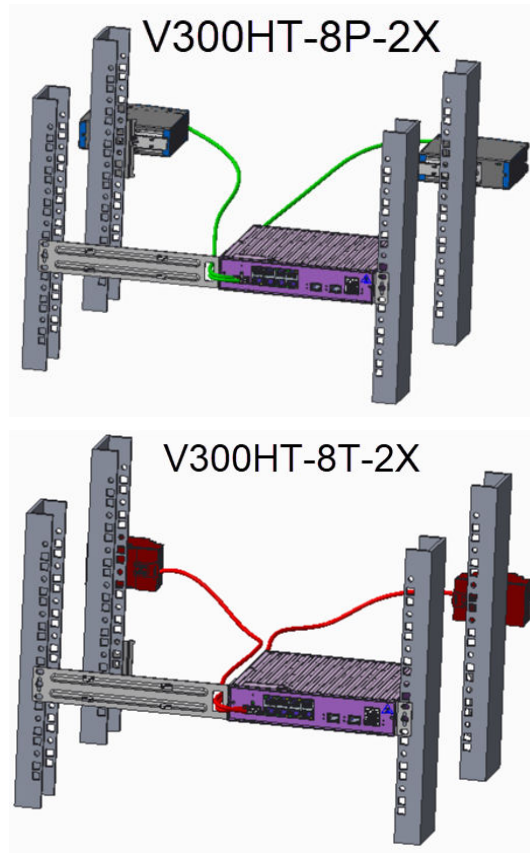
V300HT-8P/8T-2X Single Rack Mounting with DIN Rail and PSUs
